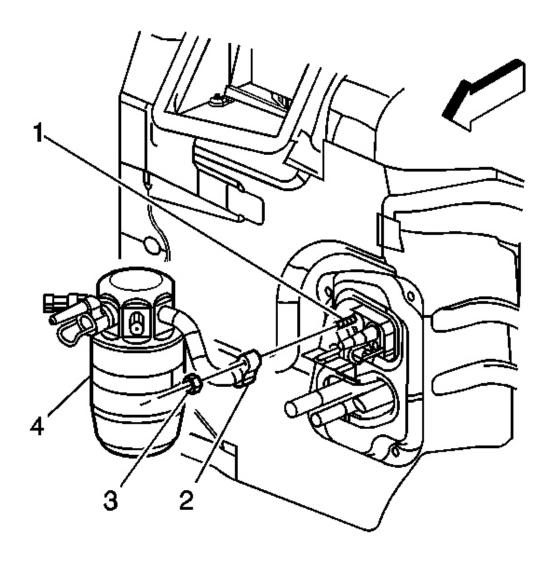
View Of HVAC Accumulator Courtesy of GENERAL MOTORS CORP.
